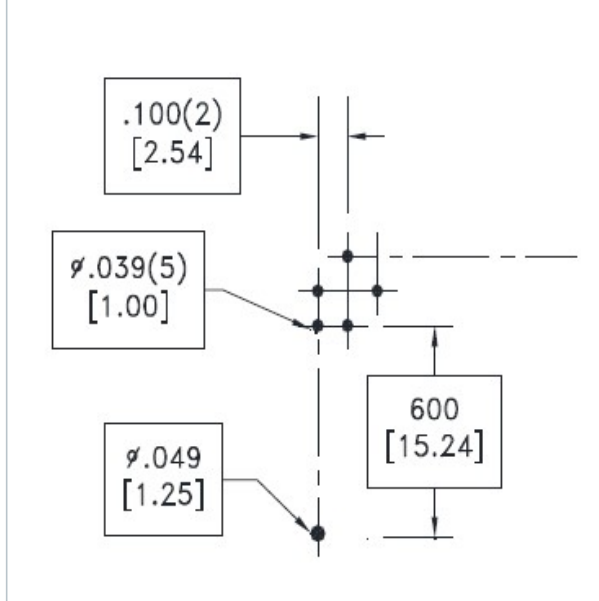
Dimensional drawing and pin placement diagram – electrical diagram
